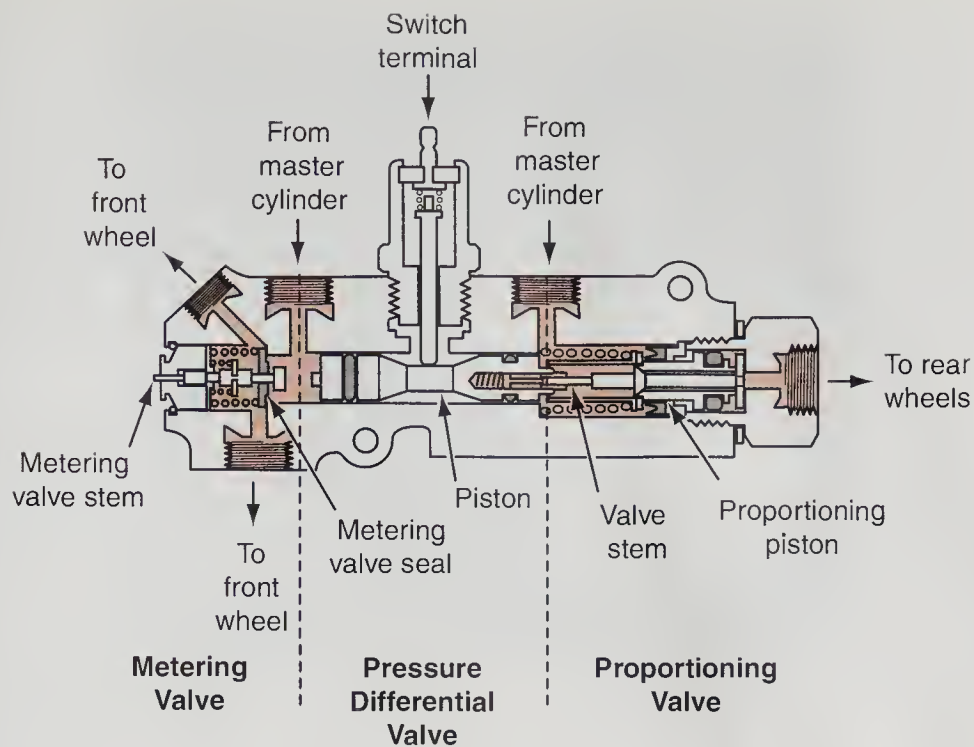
This combination valve performs three hydraulic functions and switches on the brake warning light within a single housing.
